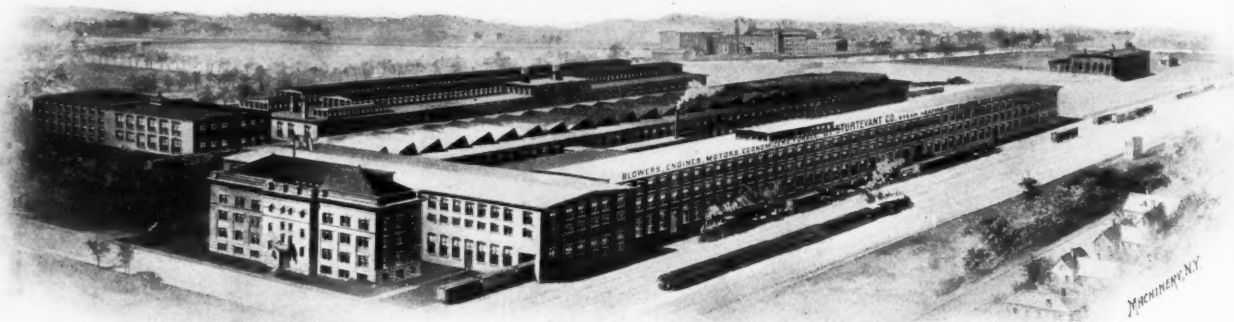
Birds-eye View of B. F. Sturtevant Plant. Machine Shop is the Central Building with Saw-tooth Roof.
